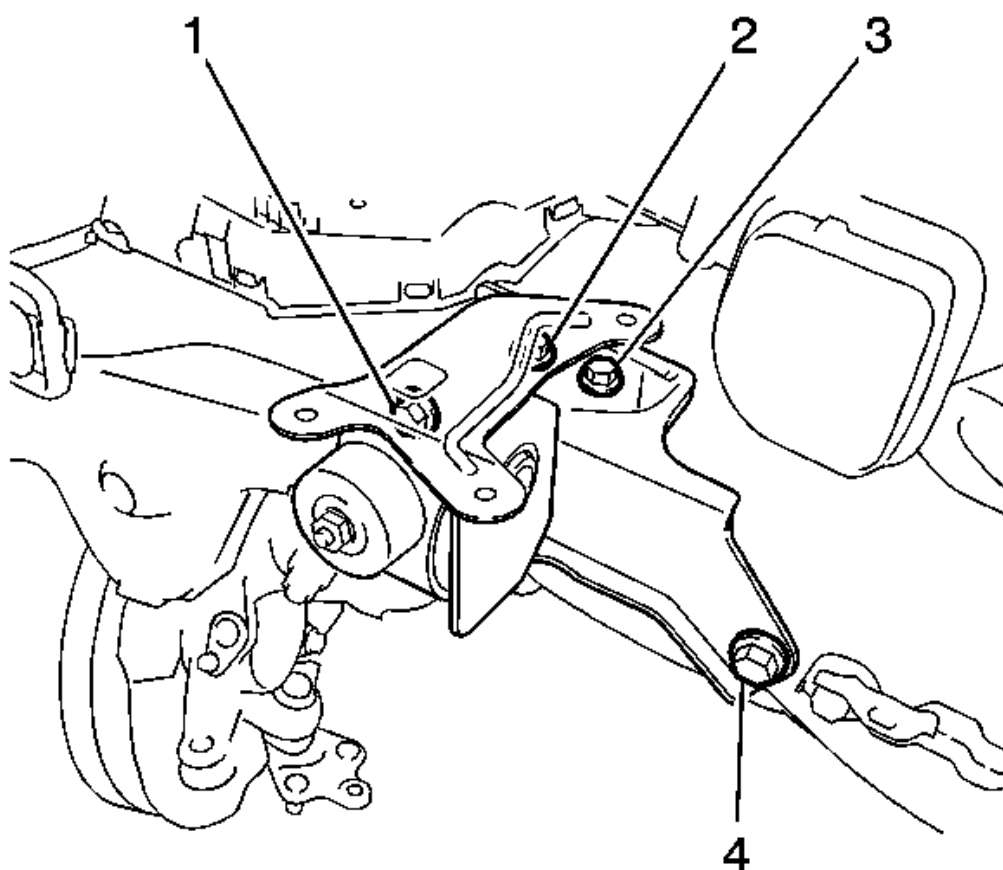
Identifying Left Engine Mounting Insulator & Bolts
